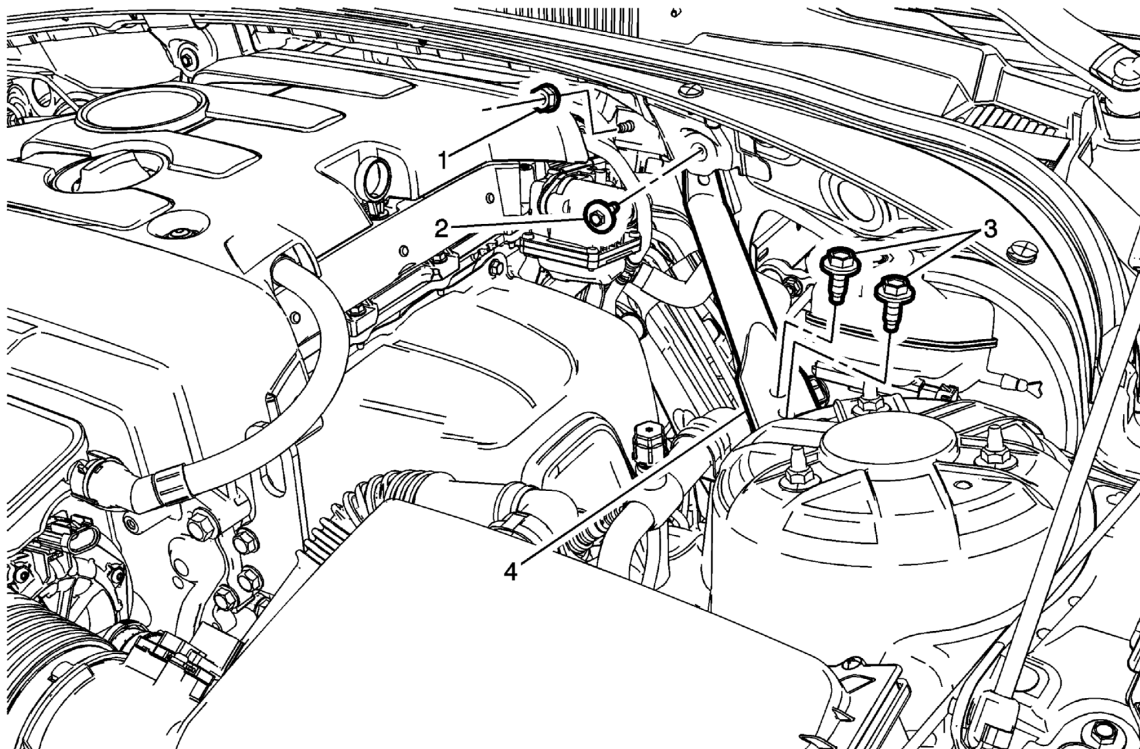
Front End Sheet Metal Diagonal Brace & Mounting Components - Left Side
